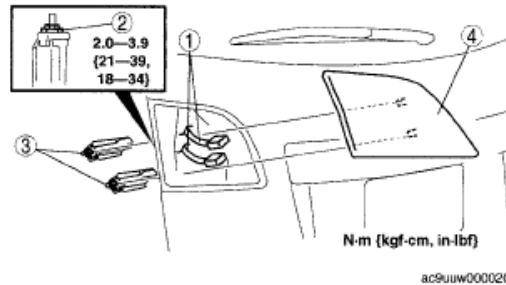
Identifying Inboard Light, Connector, Bracket, Nut & Torque Specifications
